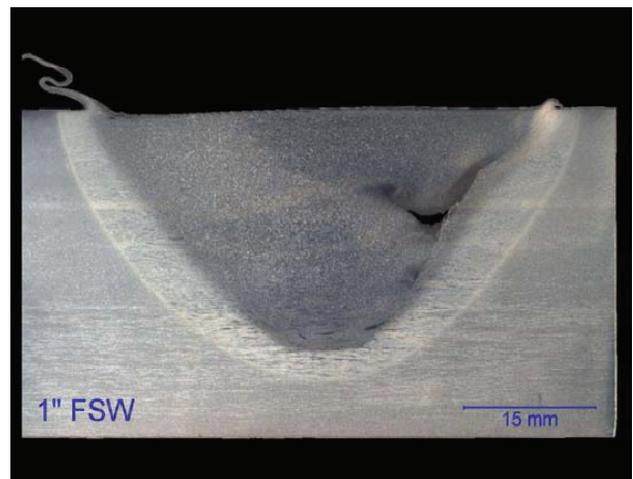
"Challenges of Friction Stir Welding of Thick-Section Steel: John M. Seaman, et al., Fig. 6 - 25 mm-thick FSW with a wormhole defect on the advancing side. Dotted lines indicate material flow patterns."
